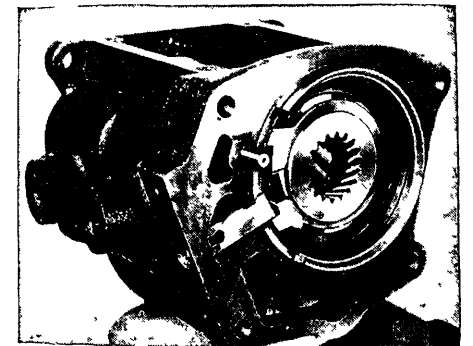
Reverse the order of disassembly to assemble the unit. After inserting the pawl with the notched side up as shown, install blocker assembly and cover plate, being sure blocker ring and pawl are properly positioned. Then install large snap ring in adapter plate
